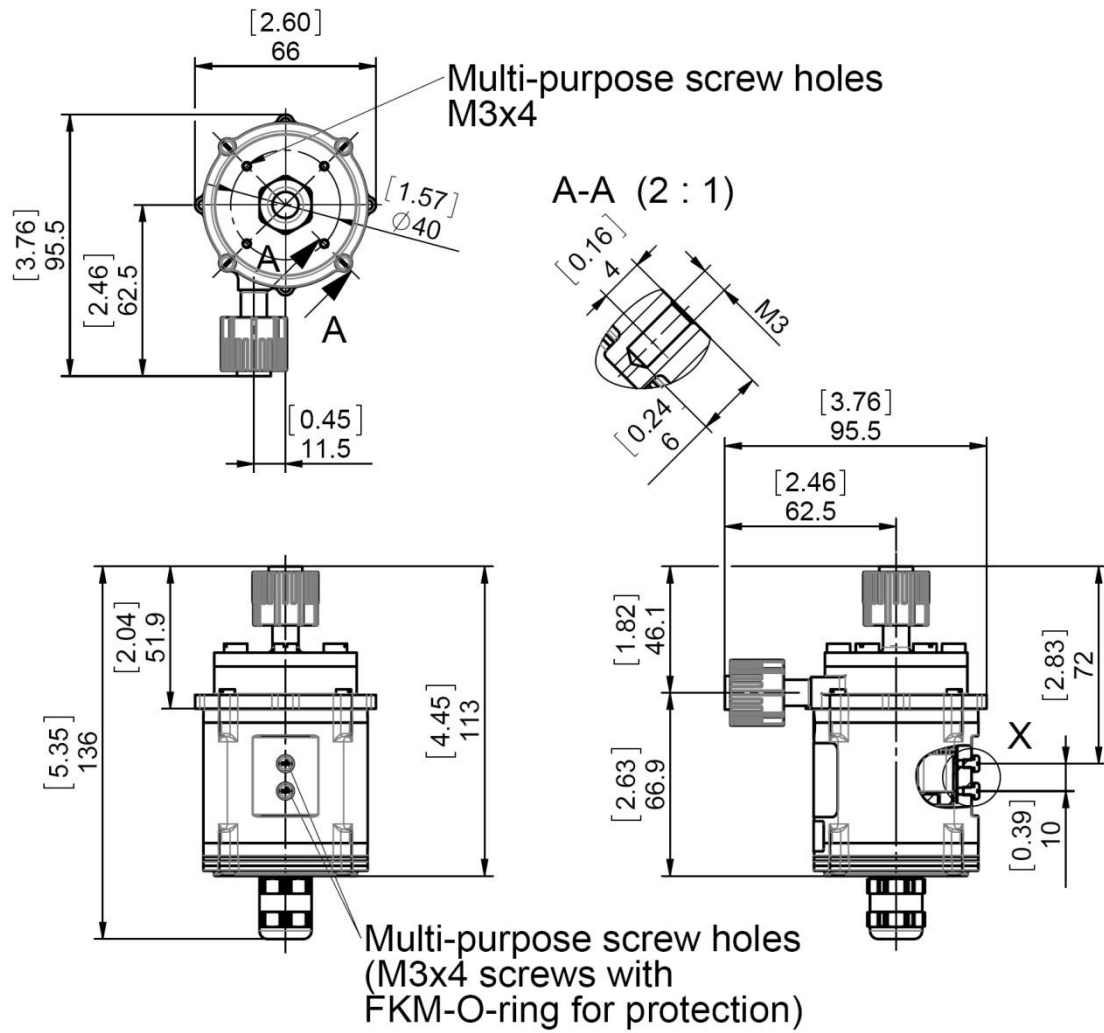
Dimensions of integrated driver with pump head (in mm and [inch])
